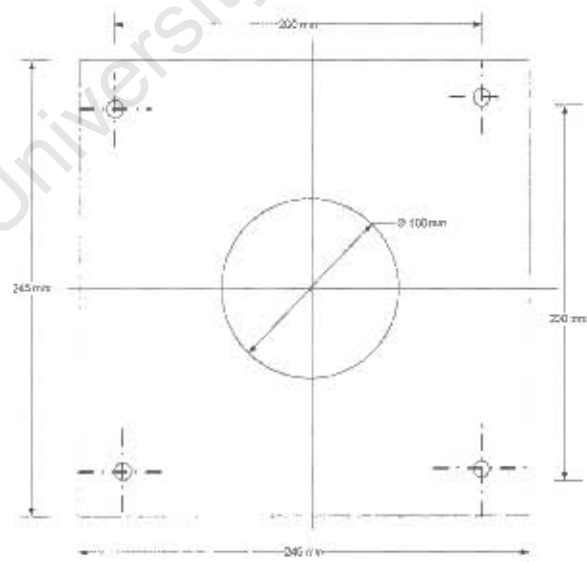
Figure showing schematic of 20mm thick clamp plate.
